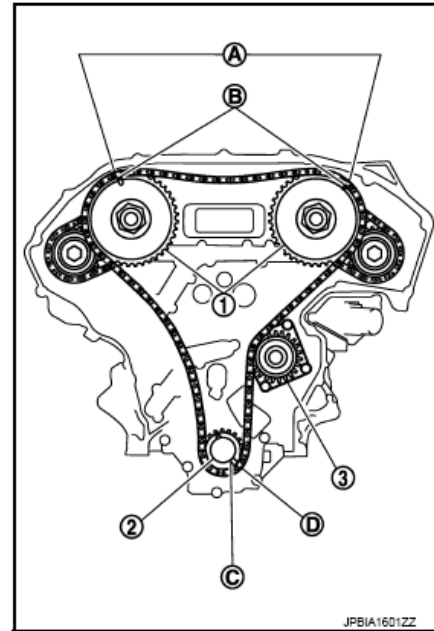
Identifying Water Pump, Crankshaft Sprocket, Timing Chain And Matching Marks
